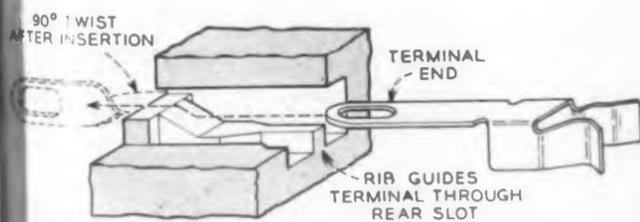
Sloped rib in jack cavity guides terminal during automatic insertion process of manufacture.
